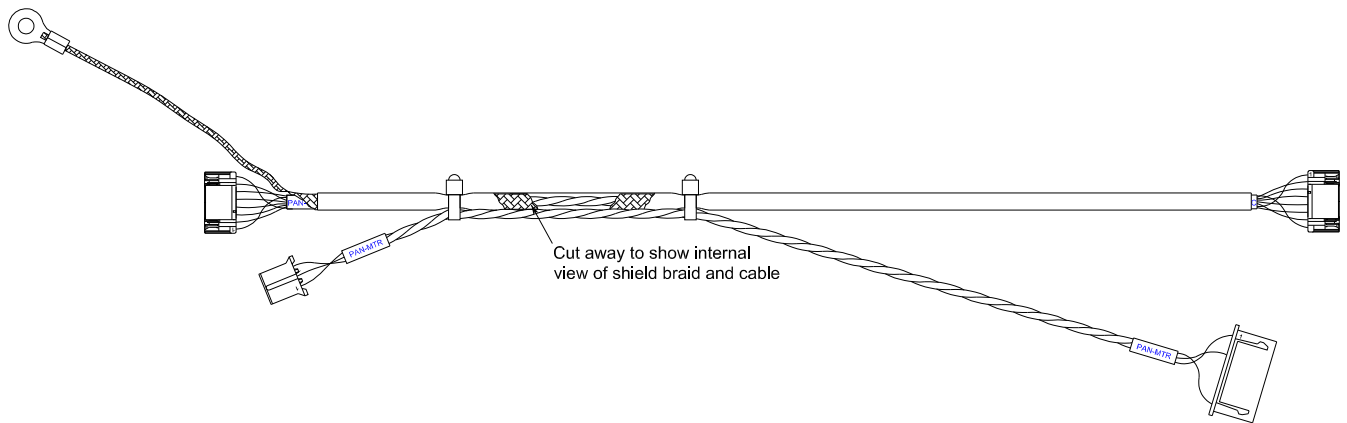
VL4000 Pan / Tilt Cable Assembly
